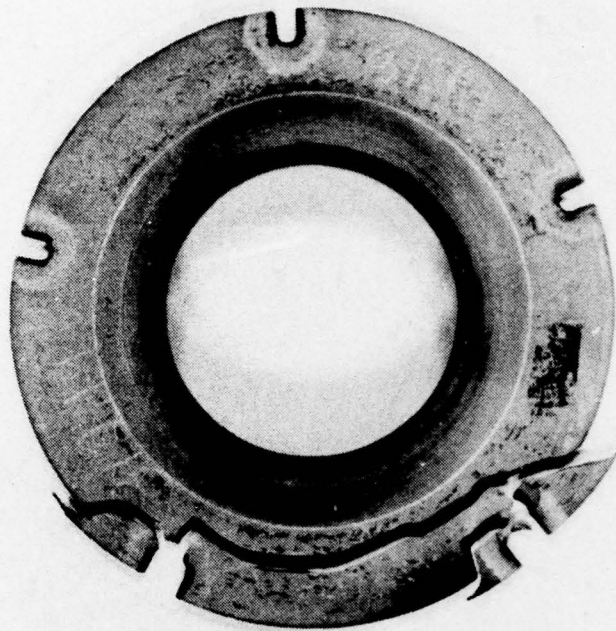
RBSi₃N₄ Rear Shroud After 50 Hour Engine Test
